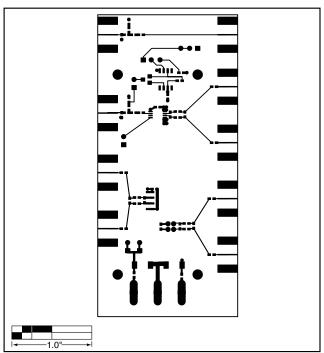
MAX3665 EV Kit PC Board Layout—Component Side
